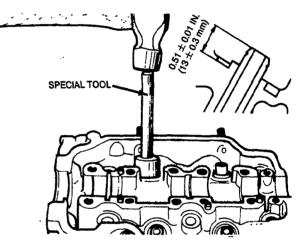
INSTALLING THE VALVE GUIDE
